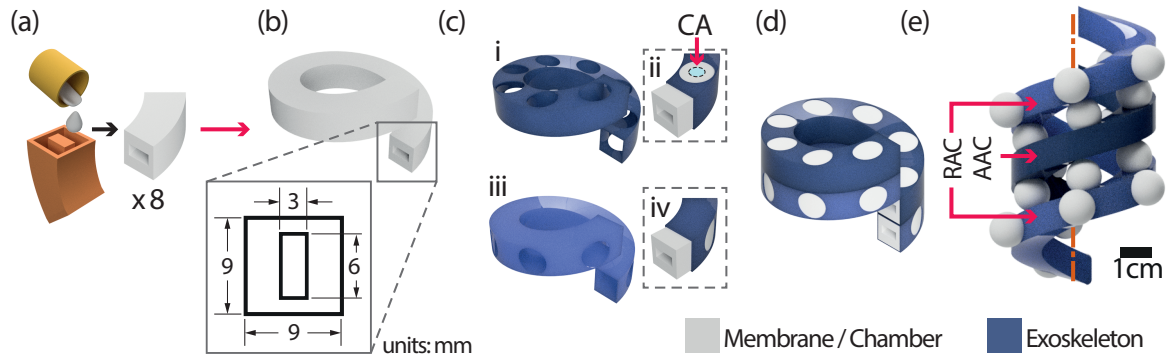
Helical configuration of the stacked balloons concept to shape the Helical Actuator (HA). (a) Fabrication mold for casting of the units that conform to (b) the helical chambers and a detailed view showing the dimensions of their cross-sectional area. (c) The exoskeletons for the (i) AAC and (iii) RAC. Inserts ii and iv show how we introduced the elastomeric units into the exoskeleton for the AAC and RAC respectively. (ii) To assemble AAC and RAC, we glued the centre of the AAC membranes to the stacked RAC exoskeleton using chemical bonding (CA). (d) The assembled Helical Hybrid Actuator (HA). (e) Conceptual image of the HA actuated with one turn of the AAC and two turns of the RAC.
